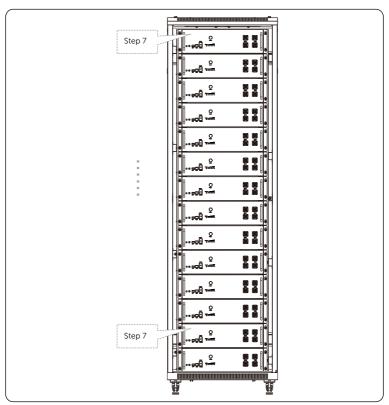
Attaching assembled mounting rails and tightening M6 screws
